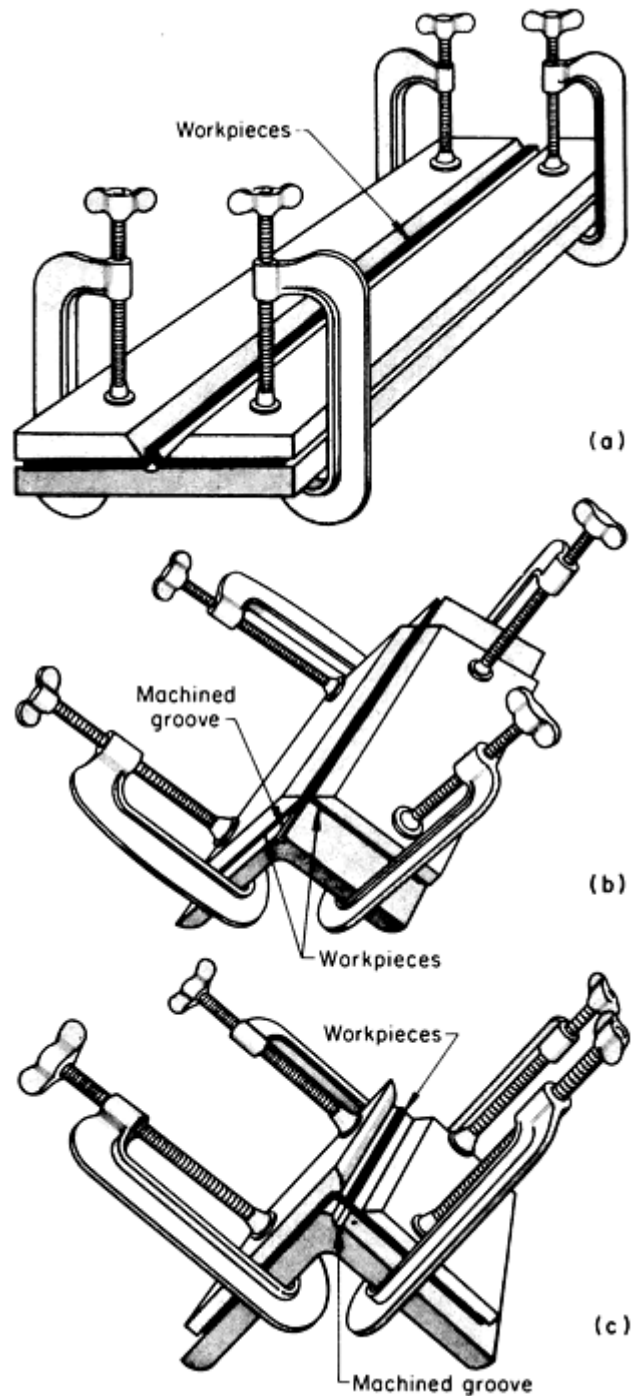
APPLICATION OF JIGS TO MAINTAIN FLATNESS AND TO MINIMIZE DISTORTION WHEN WELDING THIN SHEET MATERIAL
